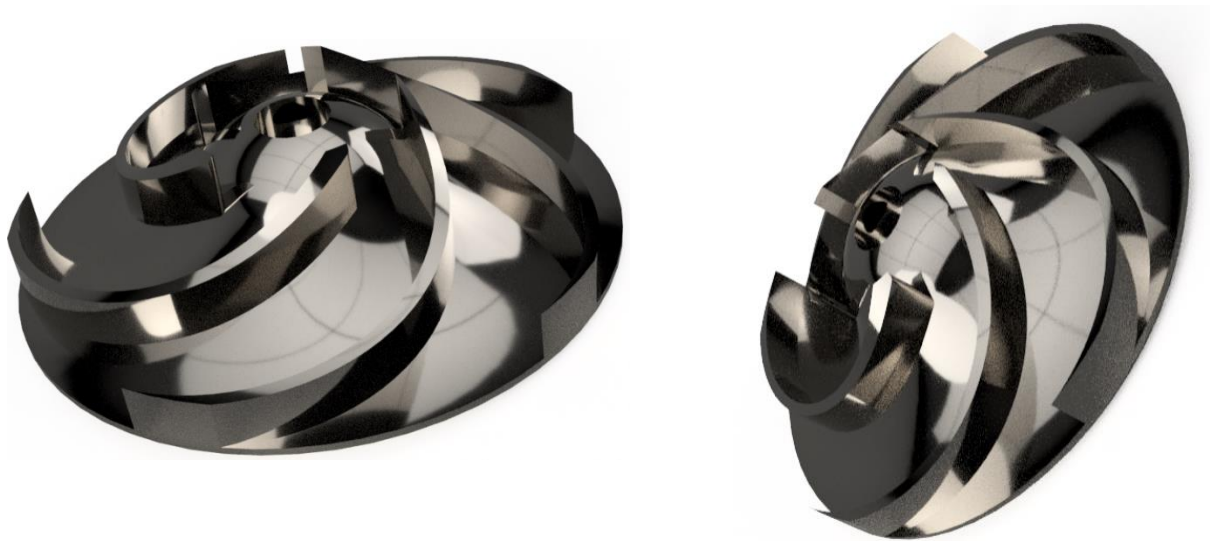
, 2.24: Rendered designs of chosen impeller.
